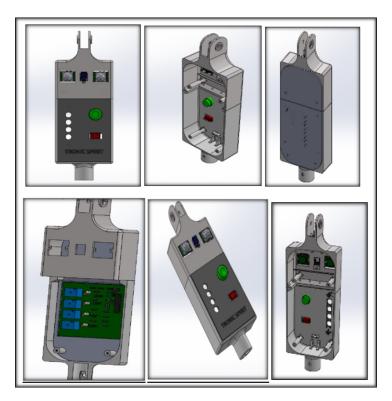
Final Sketch of the Product Enclosure using SolidWorks
